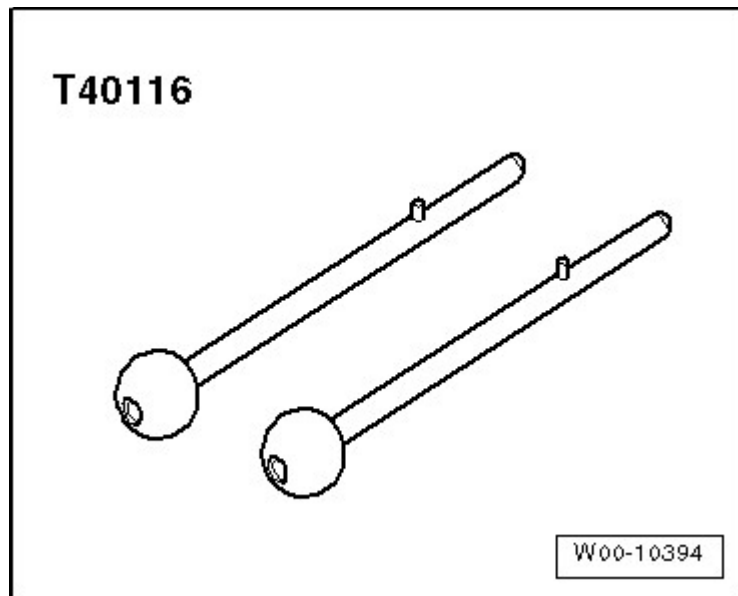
Identifying Securing Pins 1 Set = Qty. 2 T40116
